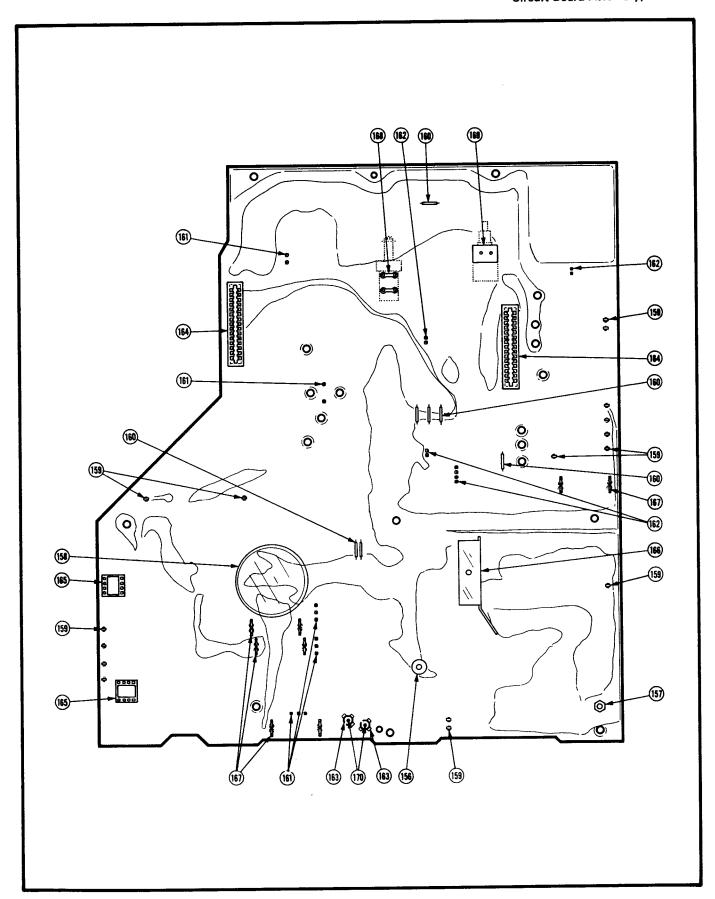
Circuit Board Assembly, Interface (Sheet 4 of 4).
